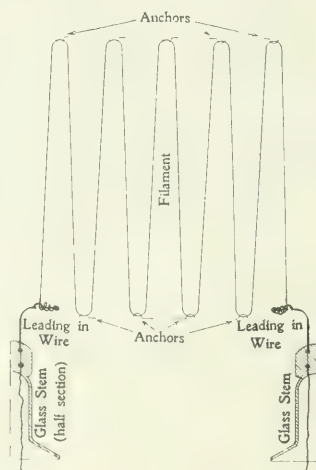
DEVELOPED SECTION OF WIRE TYPE TUNGSTEN LAMP
